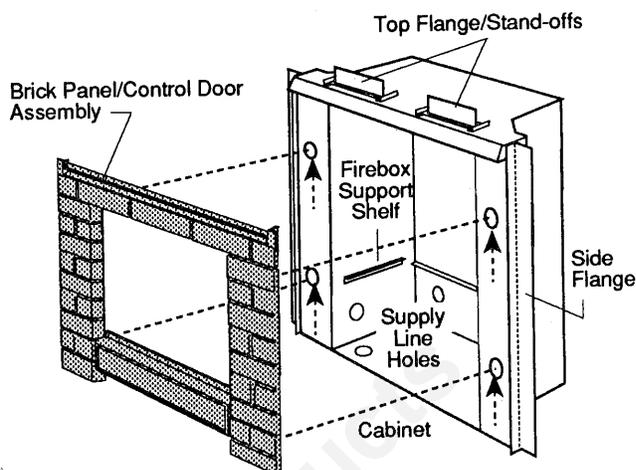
Remove the Brick Panels/Control Door and bend the top and side flanges out.
